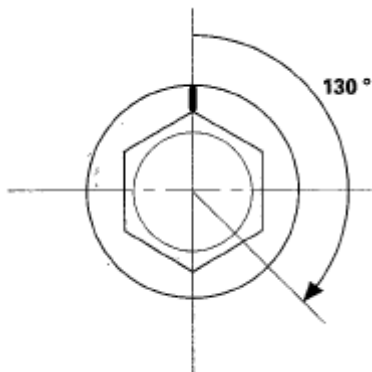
Tightening All Cylinder Head Bolts An Additional 130°
